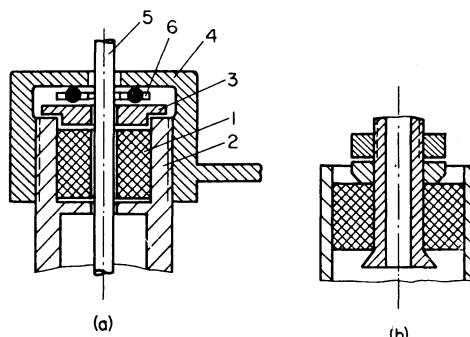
Compression cylindrical seals; (a) for easy actuation; (b) semi-permanent seal
